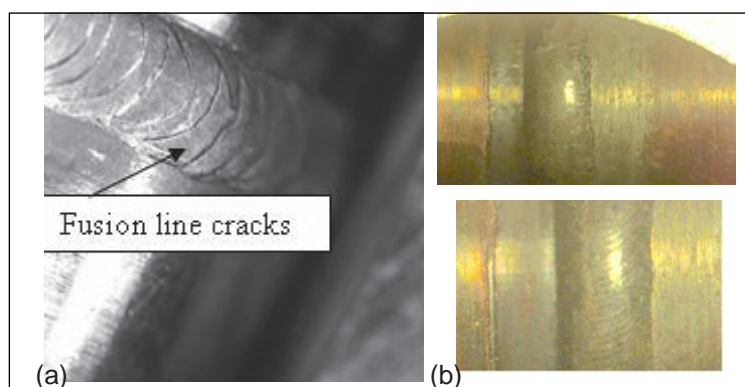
Photograph of IFAC-1 SS316 LN welds (a) Initial trials and (b) Defect-free welds
